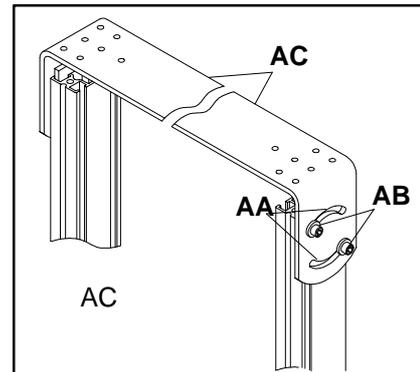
Stand Mounting Bracket for a 381 to 610 mm Wide Conveyors
